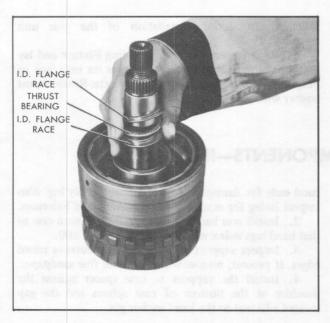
Installing Center Support Thrust Bearing Over Sun Gear Shaft
